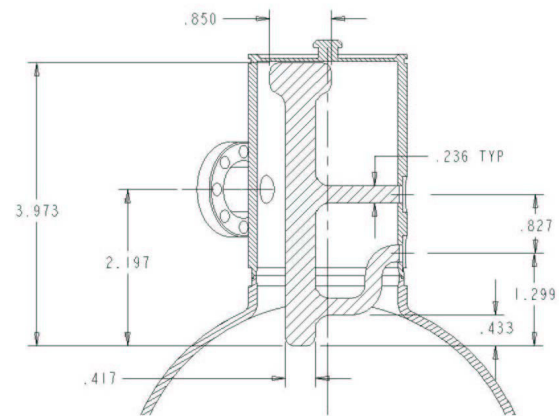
HOM damper with built in fundamental filter (dimensions in inch).
